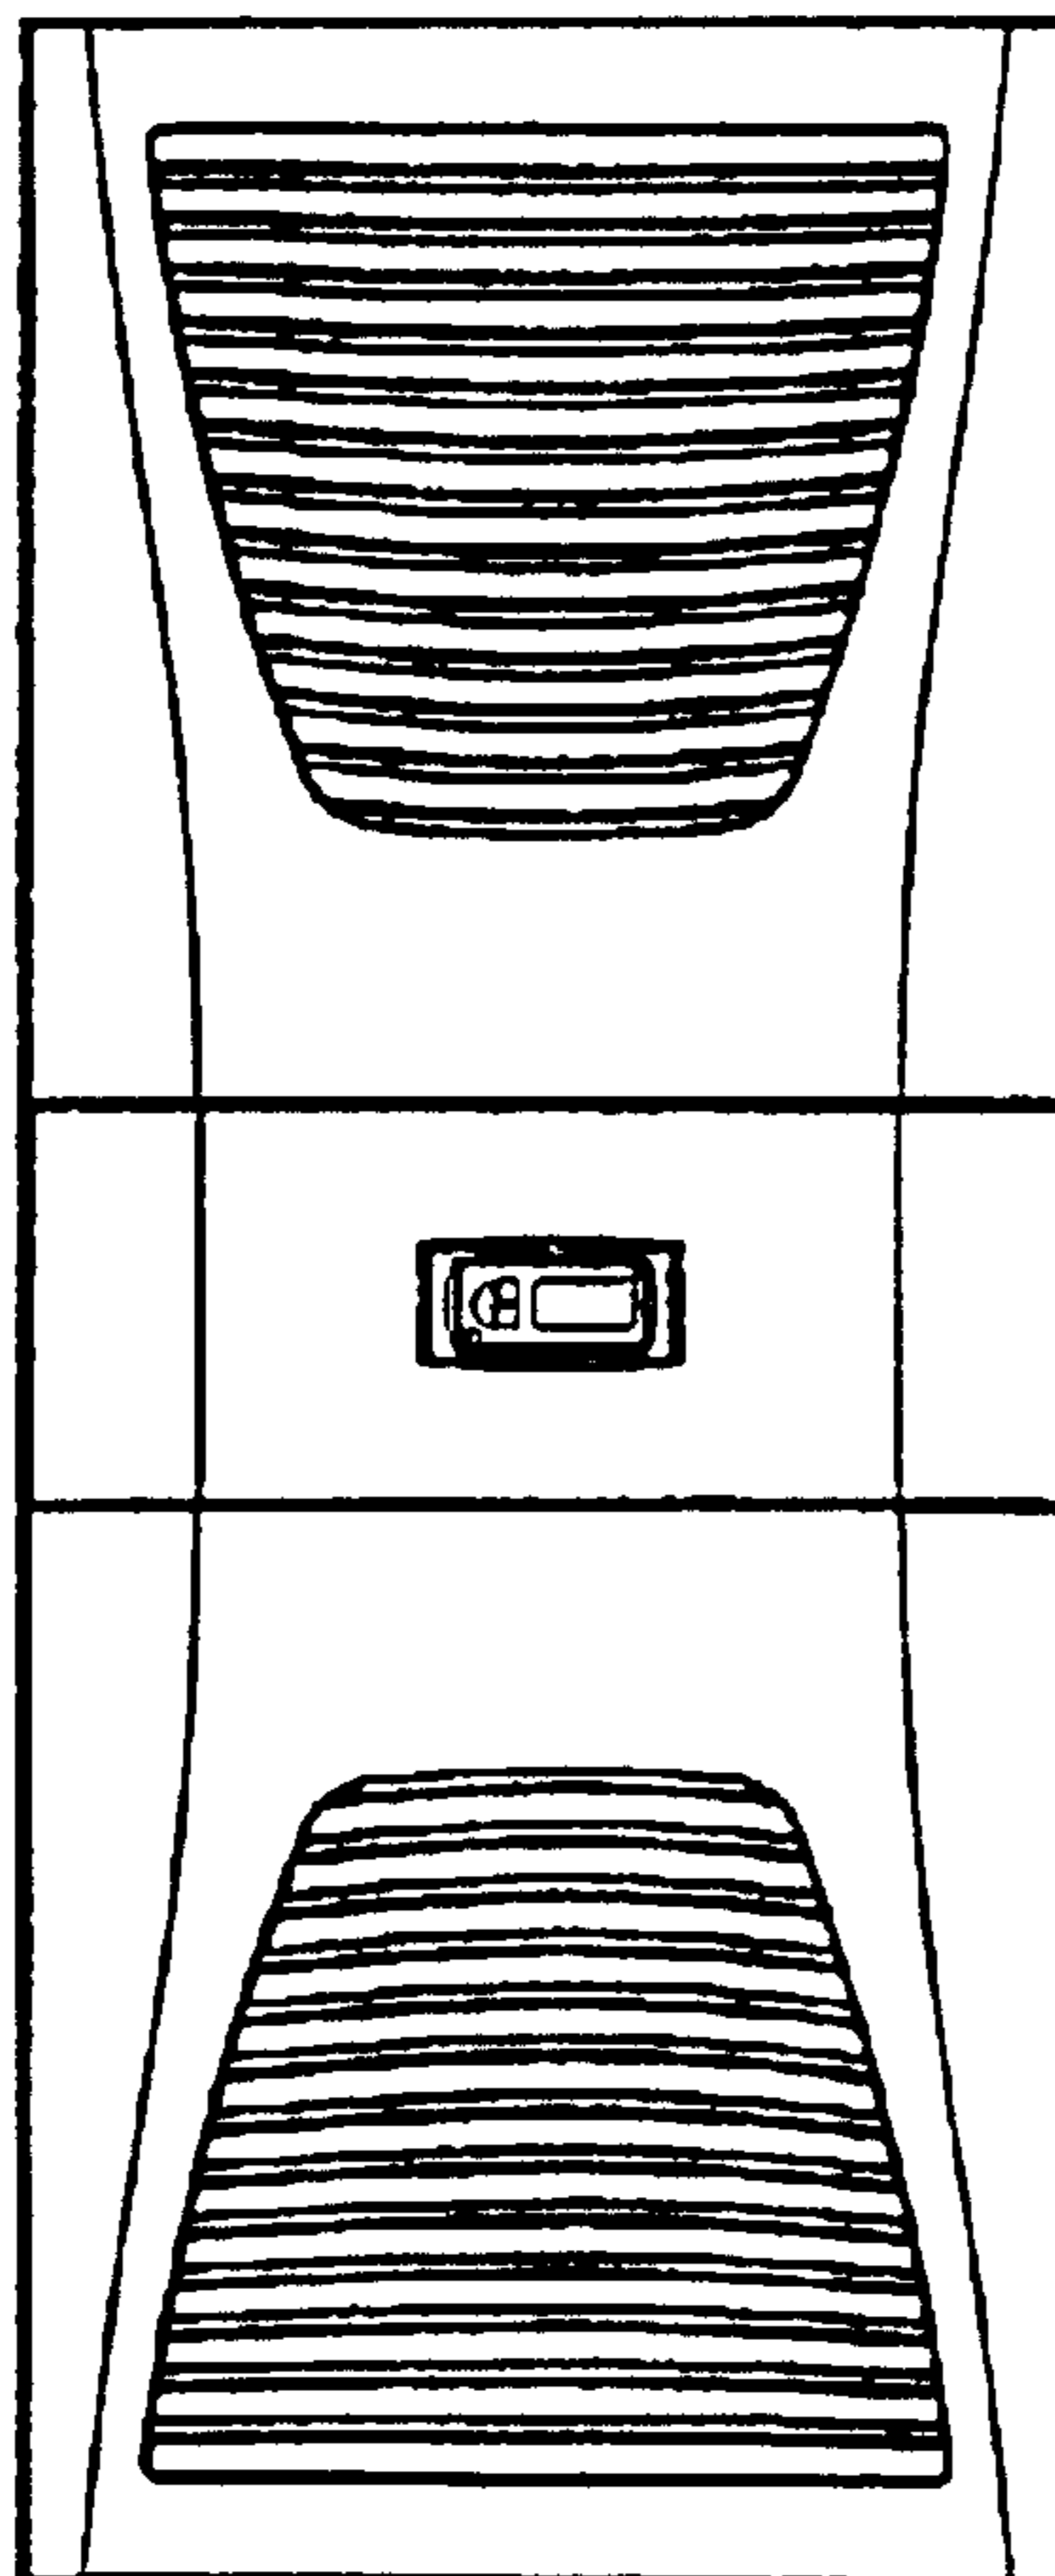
is a top view of the air conditioner, as shown in FIG. 1;
